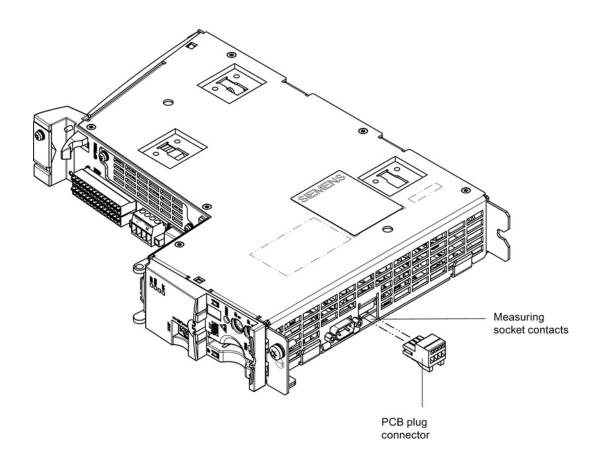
Installing a PCB plug connector (from Phoenix Contact) into the measuring socket contacts
